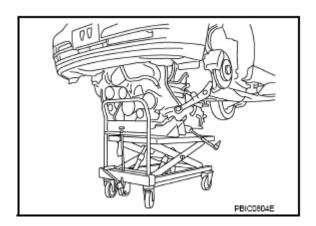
Supporting Bottom Of Suspension Member And Transmission Assembly Using Transmission Jack
